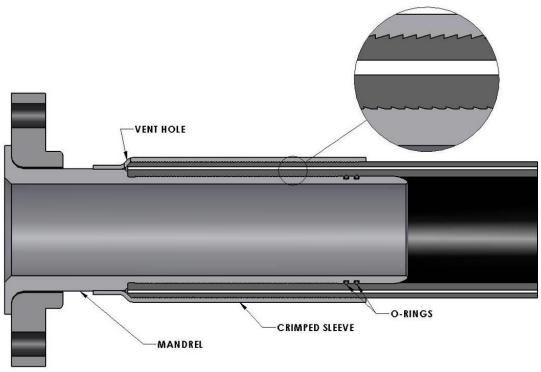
Cutaway View of a Flexpipe Crimp Fitting
